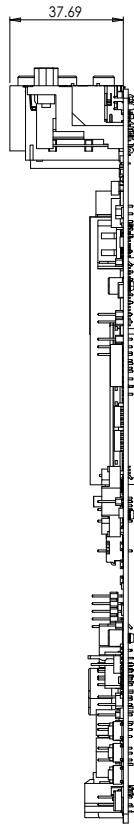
SOM-DB5830 Board Mechanical Drawing - Side
